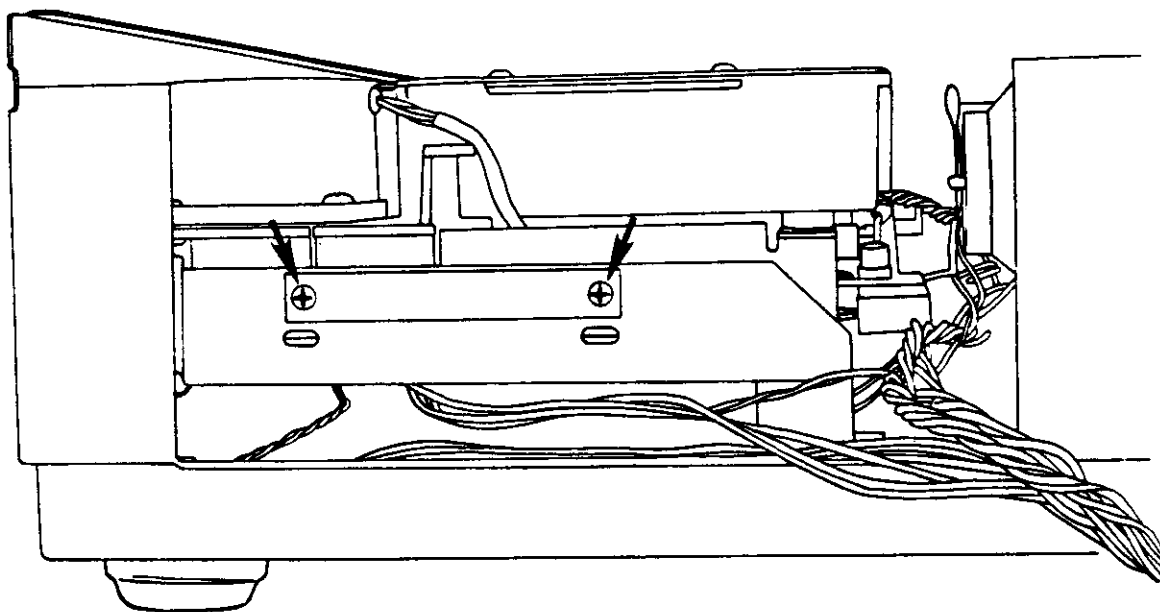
Side Mounting Screws, Hard Disk Drive
